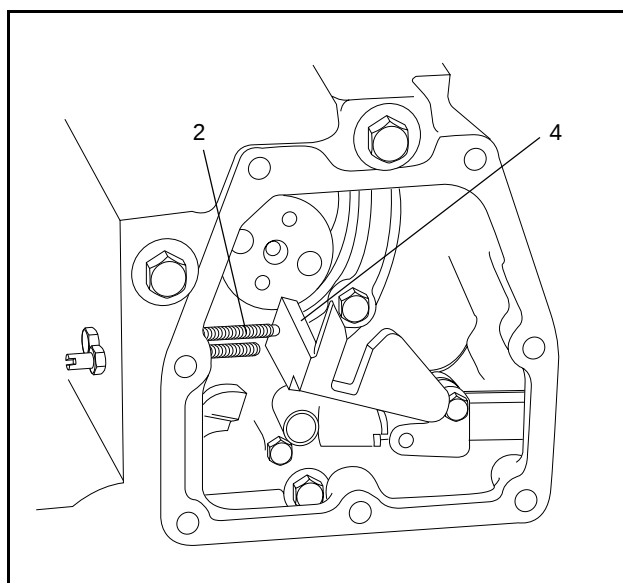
Typical Example Of Synchronizing Position (Governor Fastener Cover Removed Only For Illustration)
